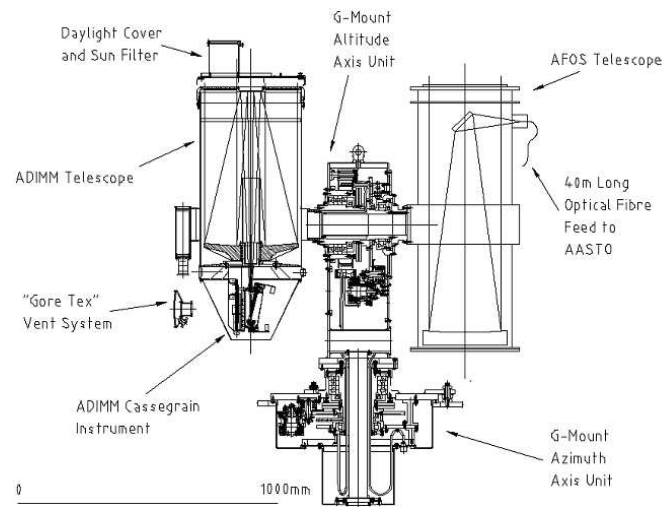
Cross section through the G-mount assembly with the A-DIMM and AFOS telescopes.
